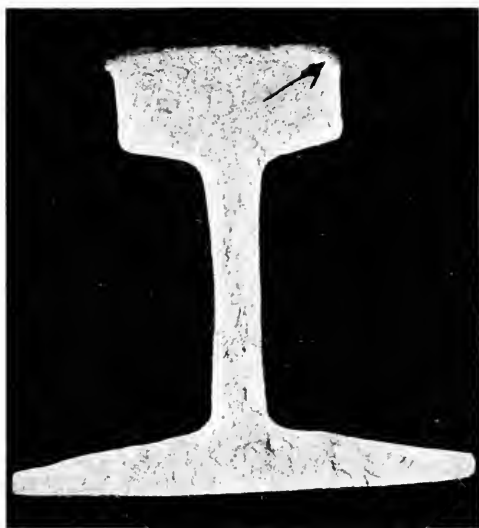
Fractured surface of rail broken in the testing machine. Fracture began at corner of head at place indicated by arrow.
